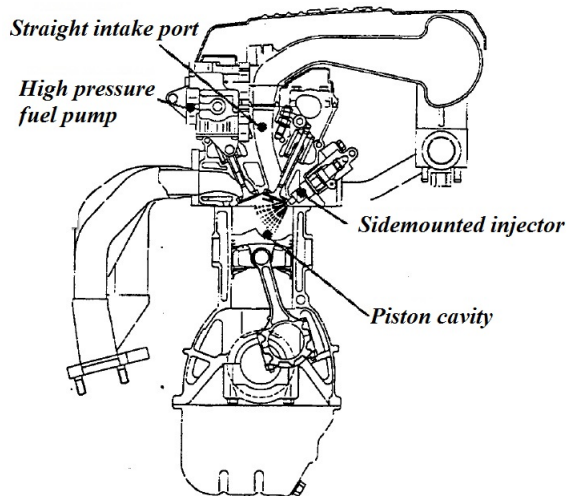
Mitsubishi GDI engine with the wall guided type of combustion chamber [26].
